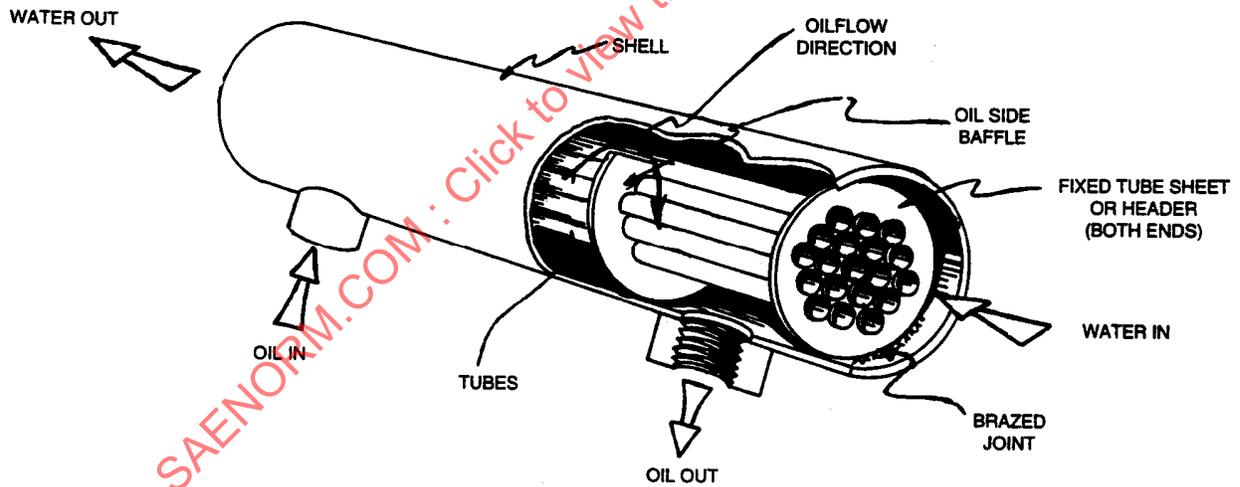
SHELL AND TUBE OIL TO WATER COOLER-FIXED BUNDLE
